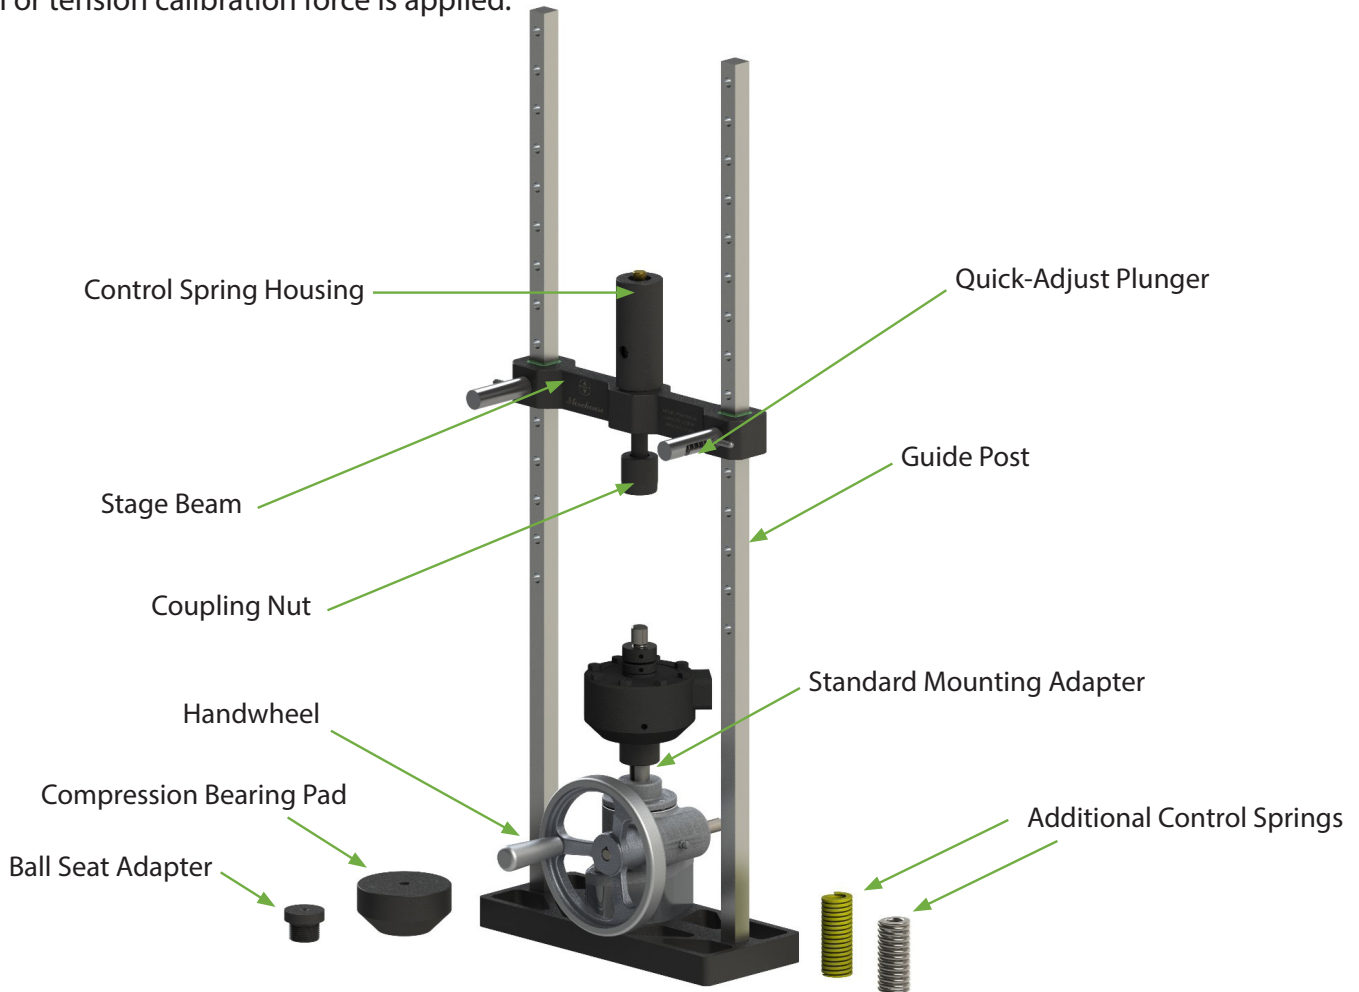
Standard Components of Morhouse Portable Calibrating Machine
